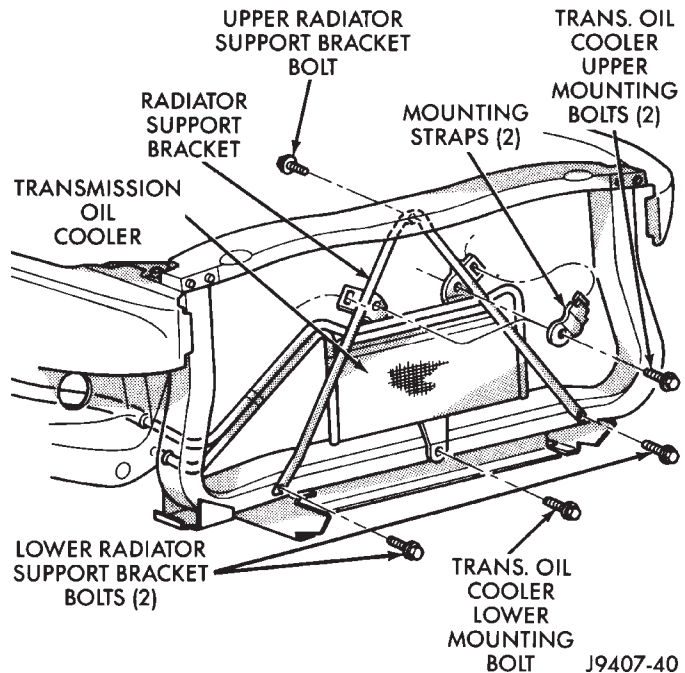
Auxiliary Transmission Oil Cooler—3.9/5.2/5.9L Engines
